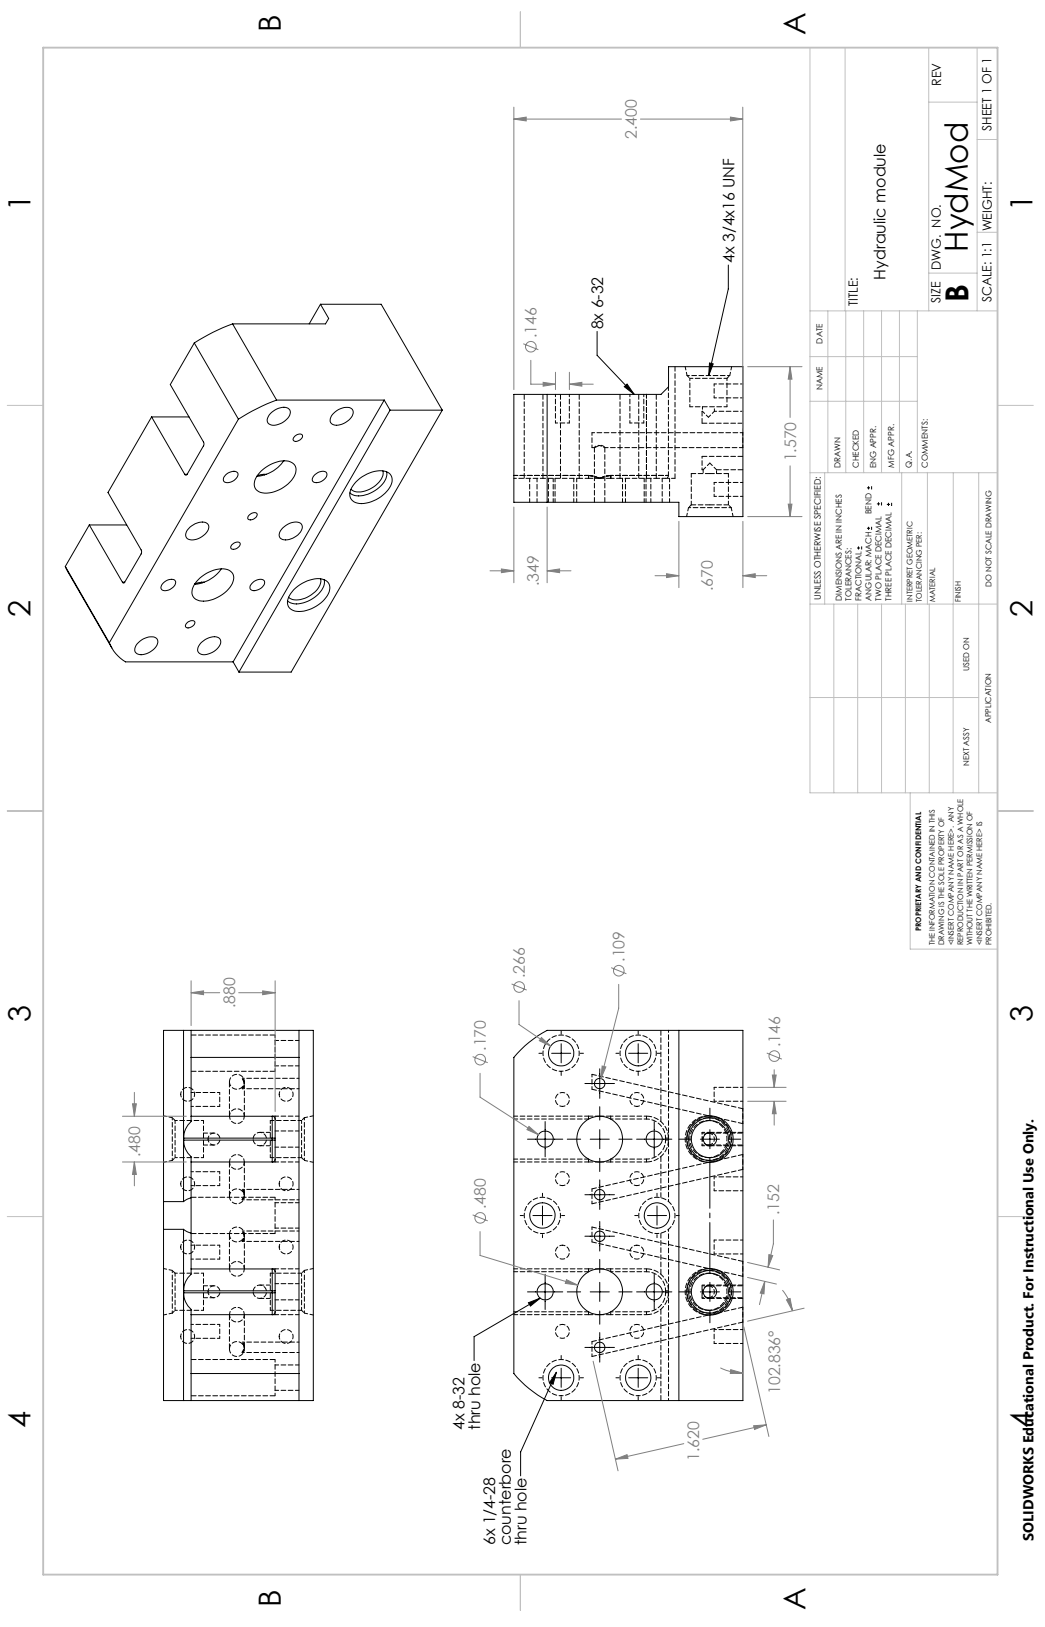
Engineering drawing of the hydraulic module to interface hydraulic pistons, servo valves, and displacement sensors.
